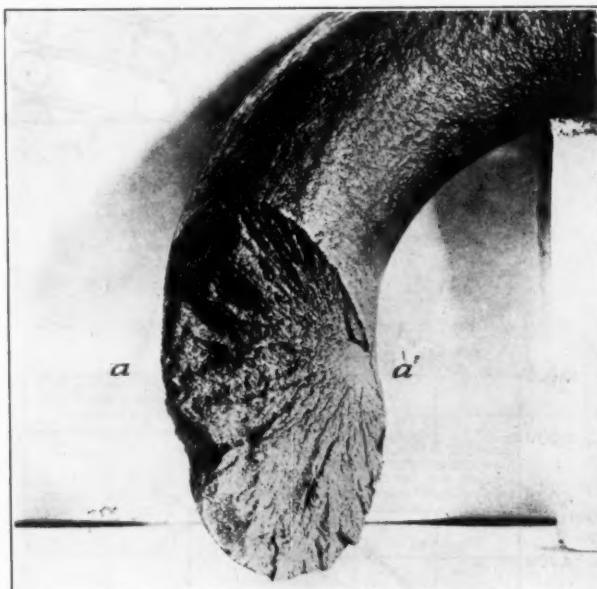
TYPICAL FRACTURE OF COIL OF A HEAVY HELICAL SPRING
